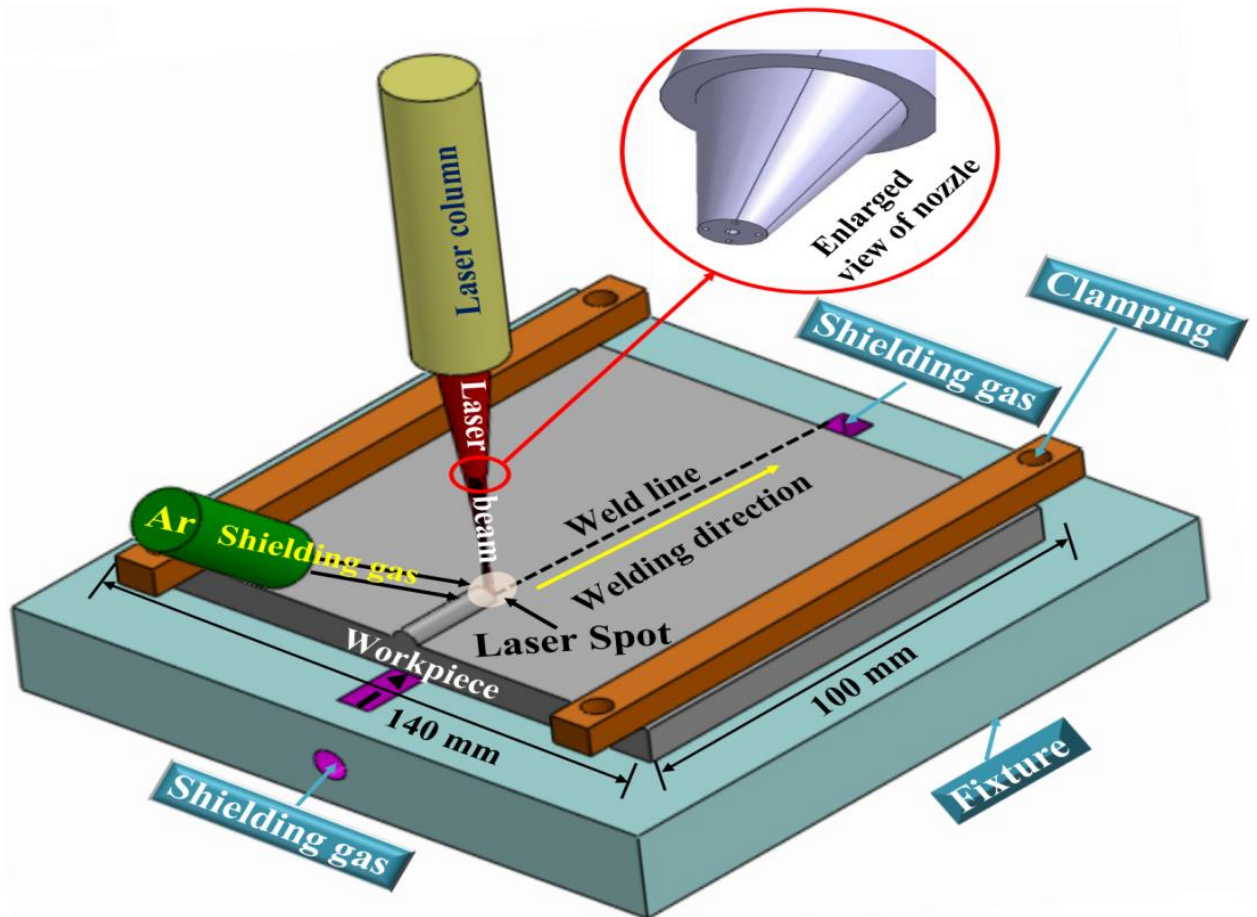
Schematic diagram of laser beam welding setup, welding direction and specially designed workpiece fixture with shielding gas delivery system
